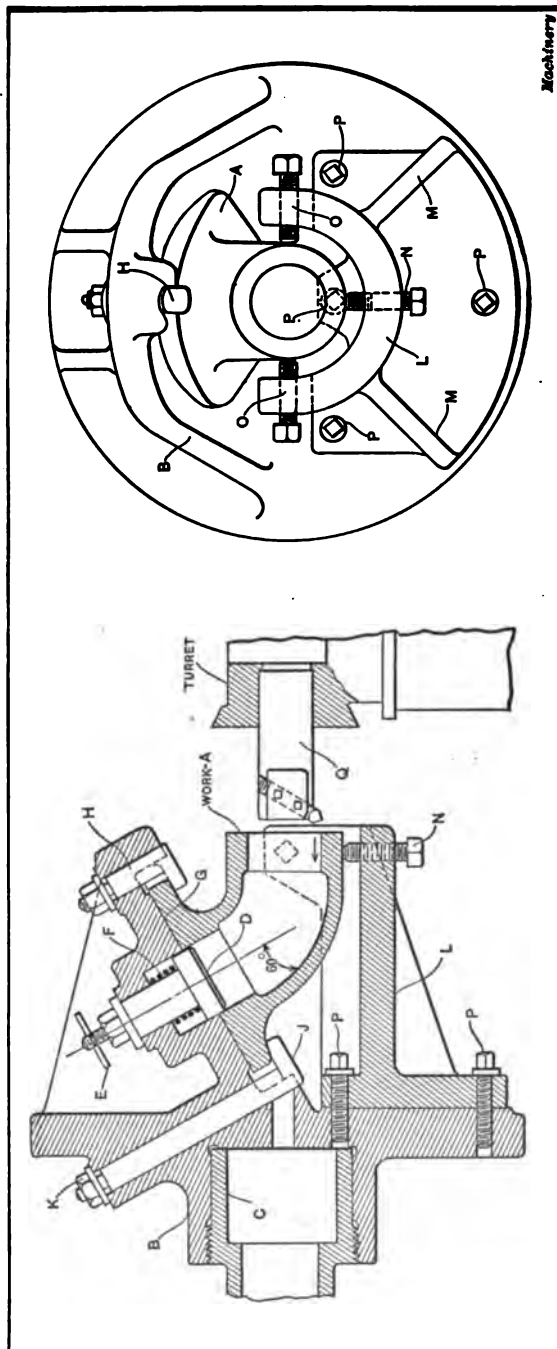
Fixture for Machining Angular Cast-Iron Fluting
